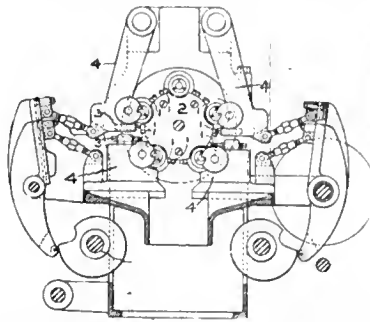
MEANS FOR RECTIFYING THE INDEXING OF MULTIPLE SPINDLE MACHINE. DAVENPORT MACHINE CO.
